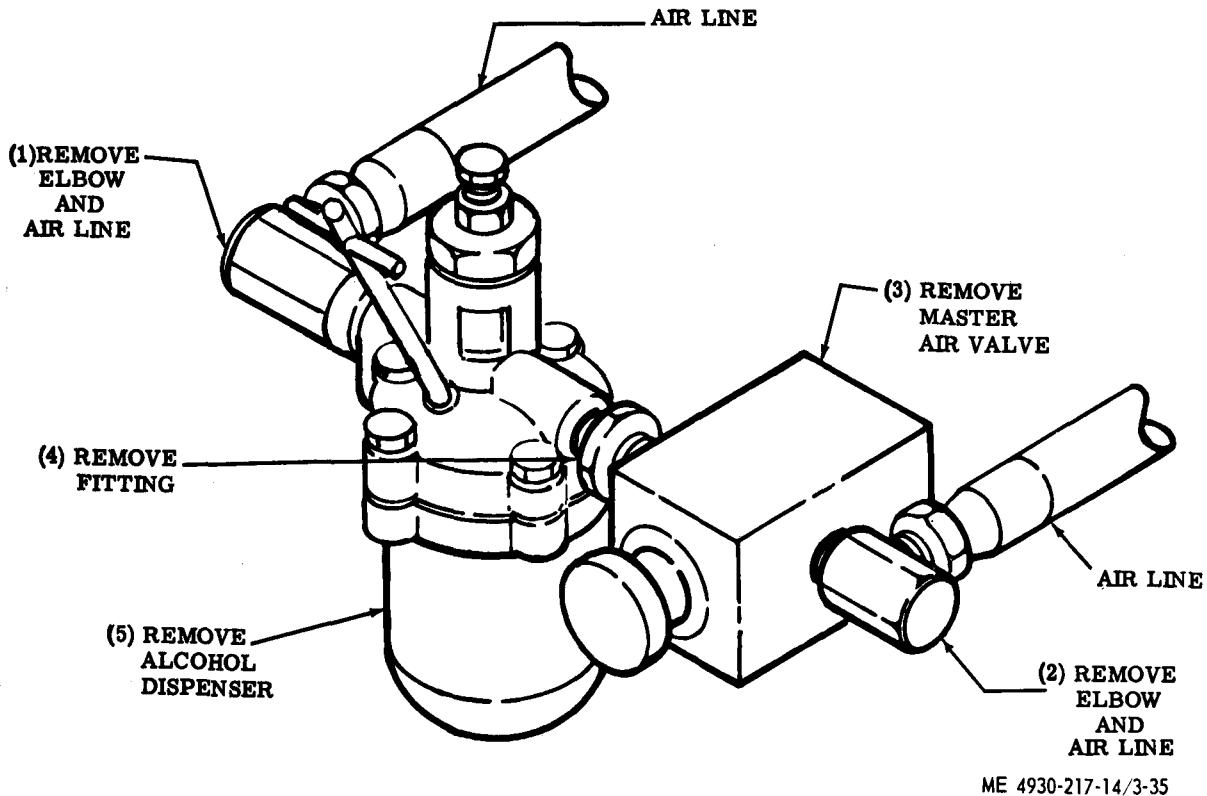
Alcohol dispenser, master air valve, lines and fittings removal and installation.
